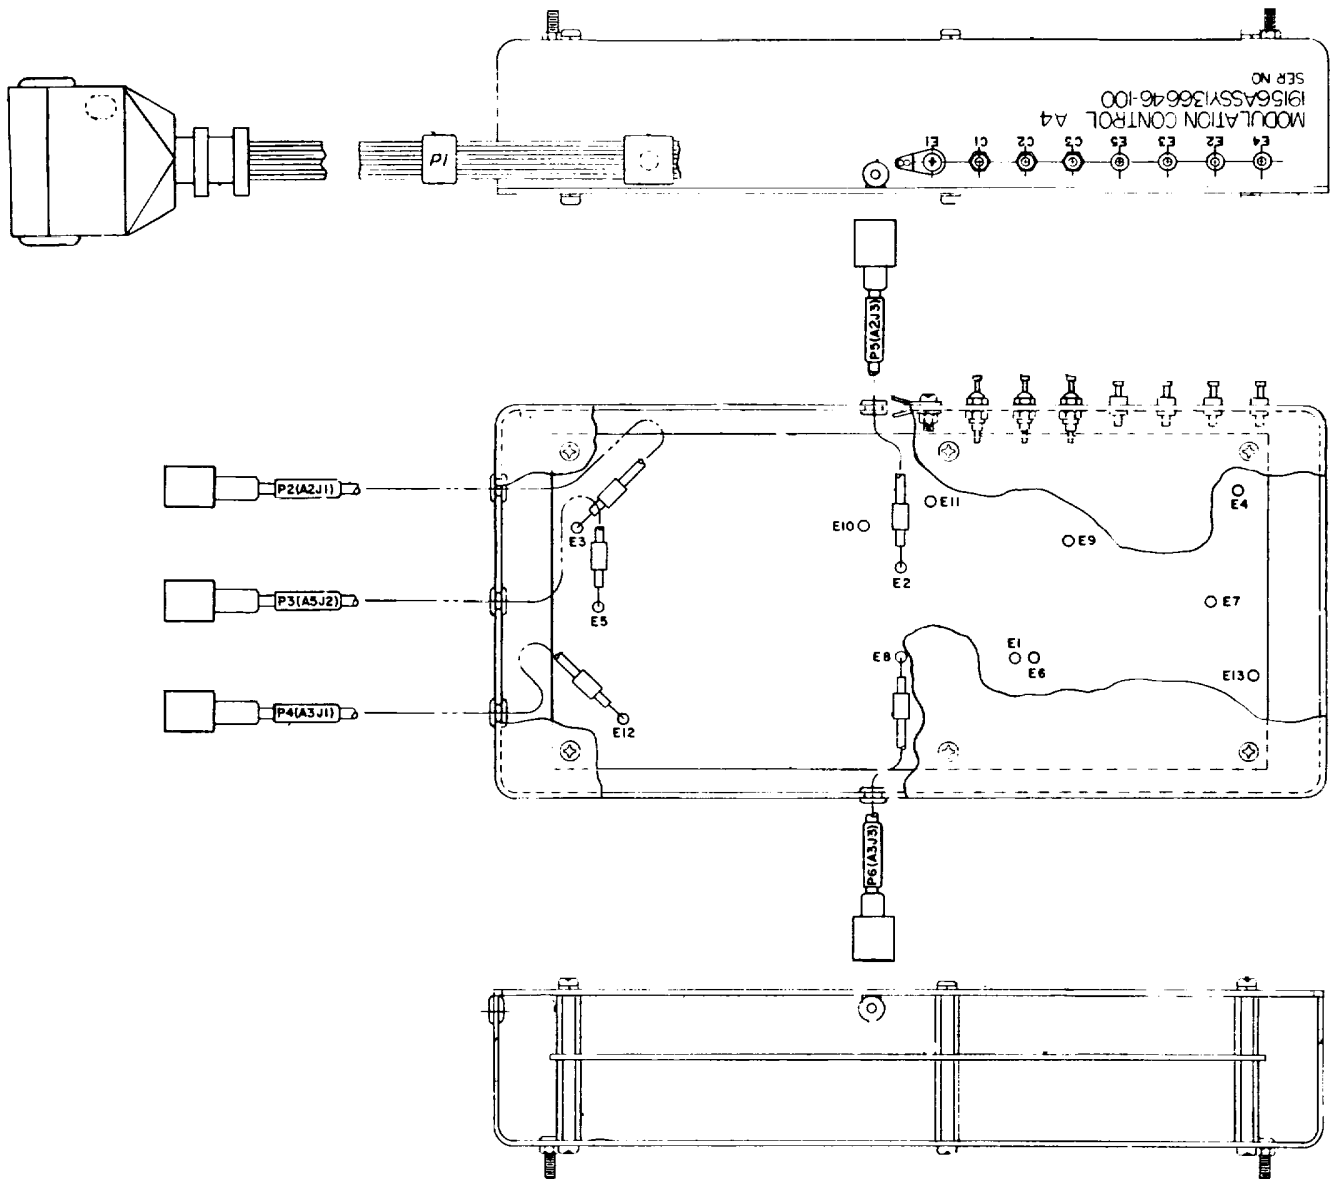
Modulation Control, 1A5A4 Parts Location Diagram
